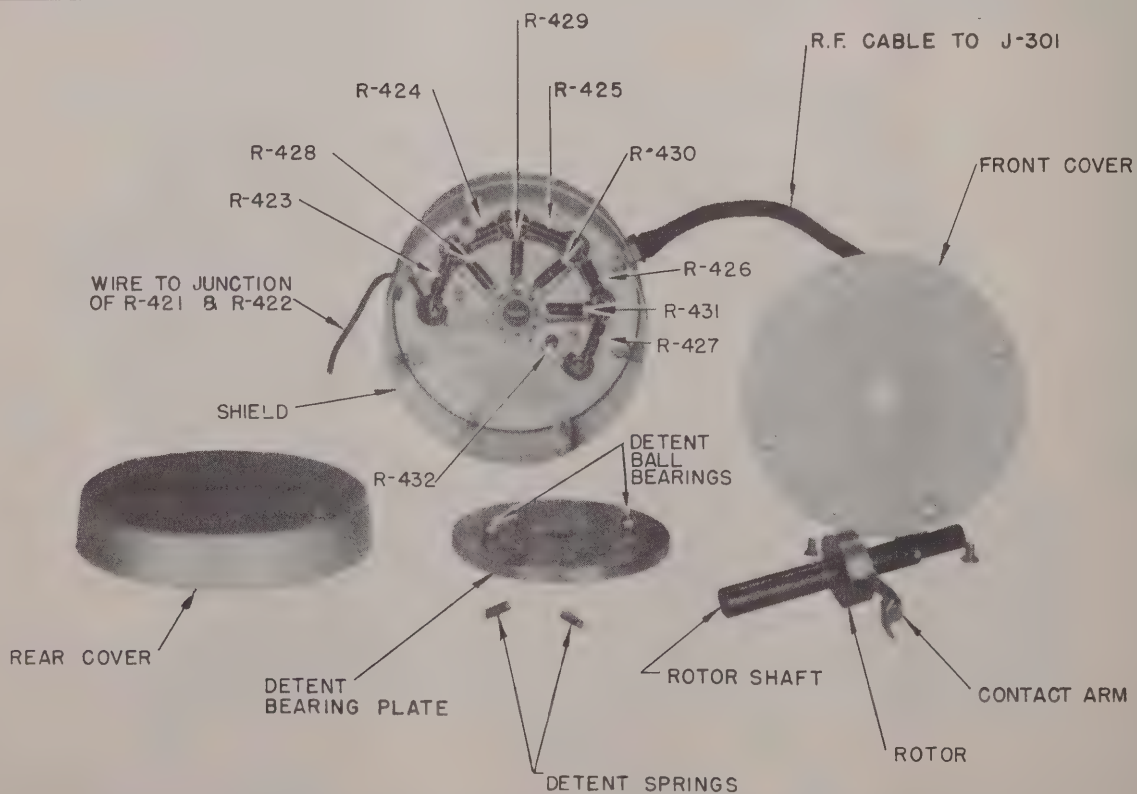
Step Attenuator, Rear View, Cover Removed
